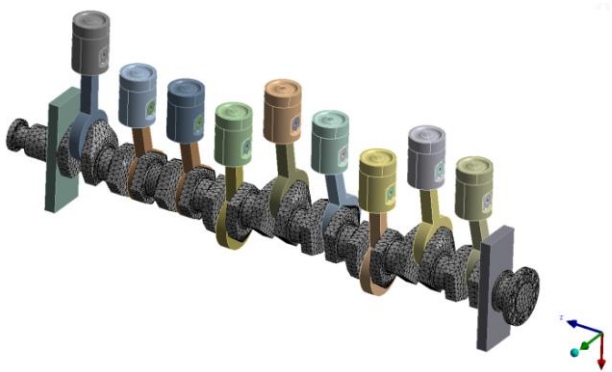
Rigid-flexible coupling finite element model of the crankshaft system
